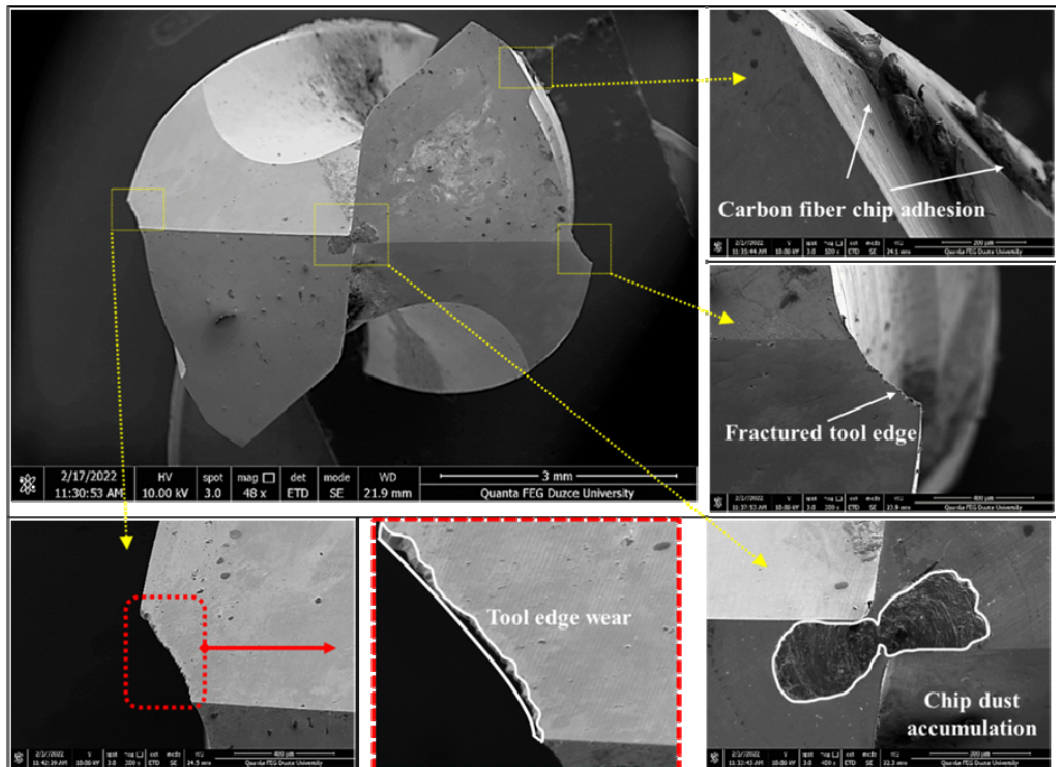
SEM morphology of the wear down surface of drill Tool 2 after drilling CARALL composite.
